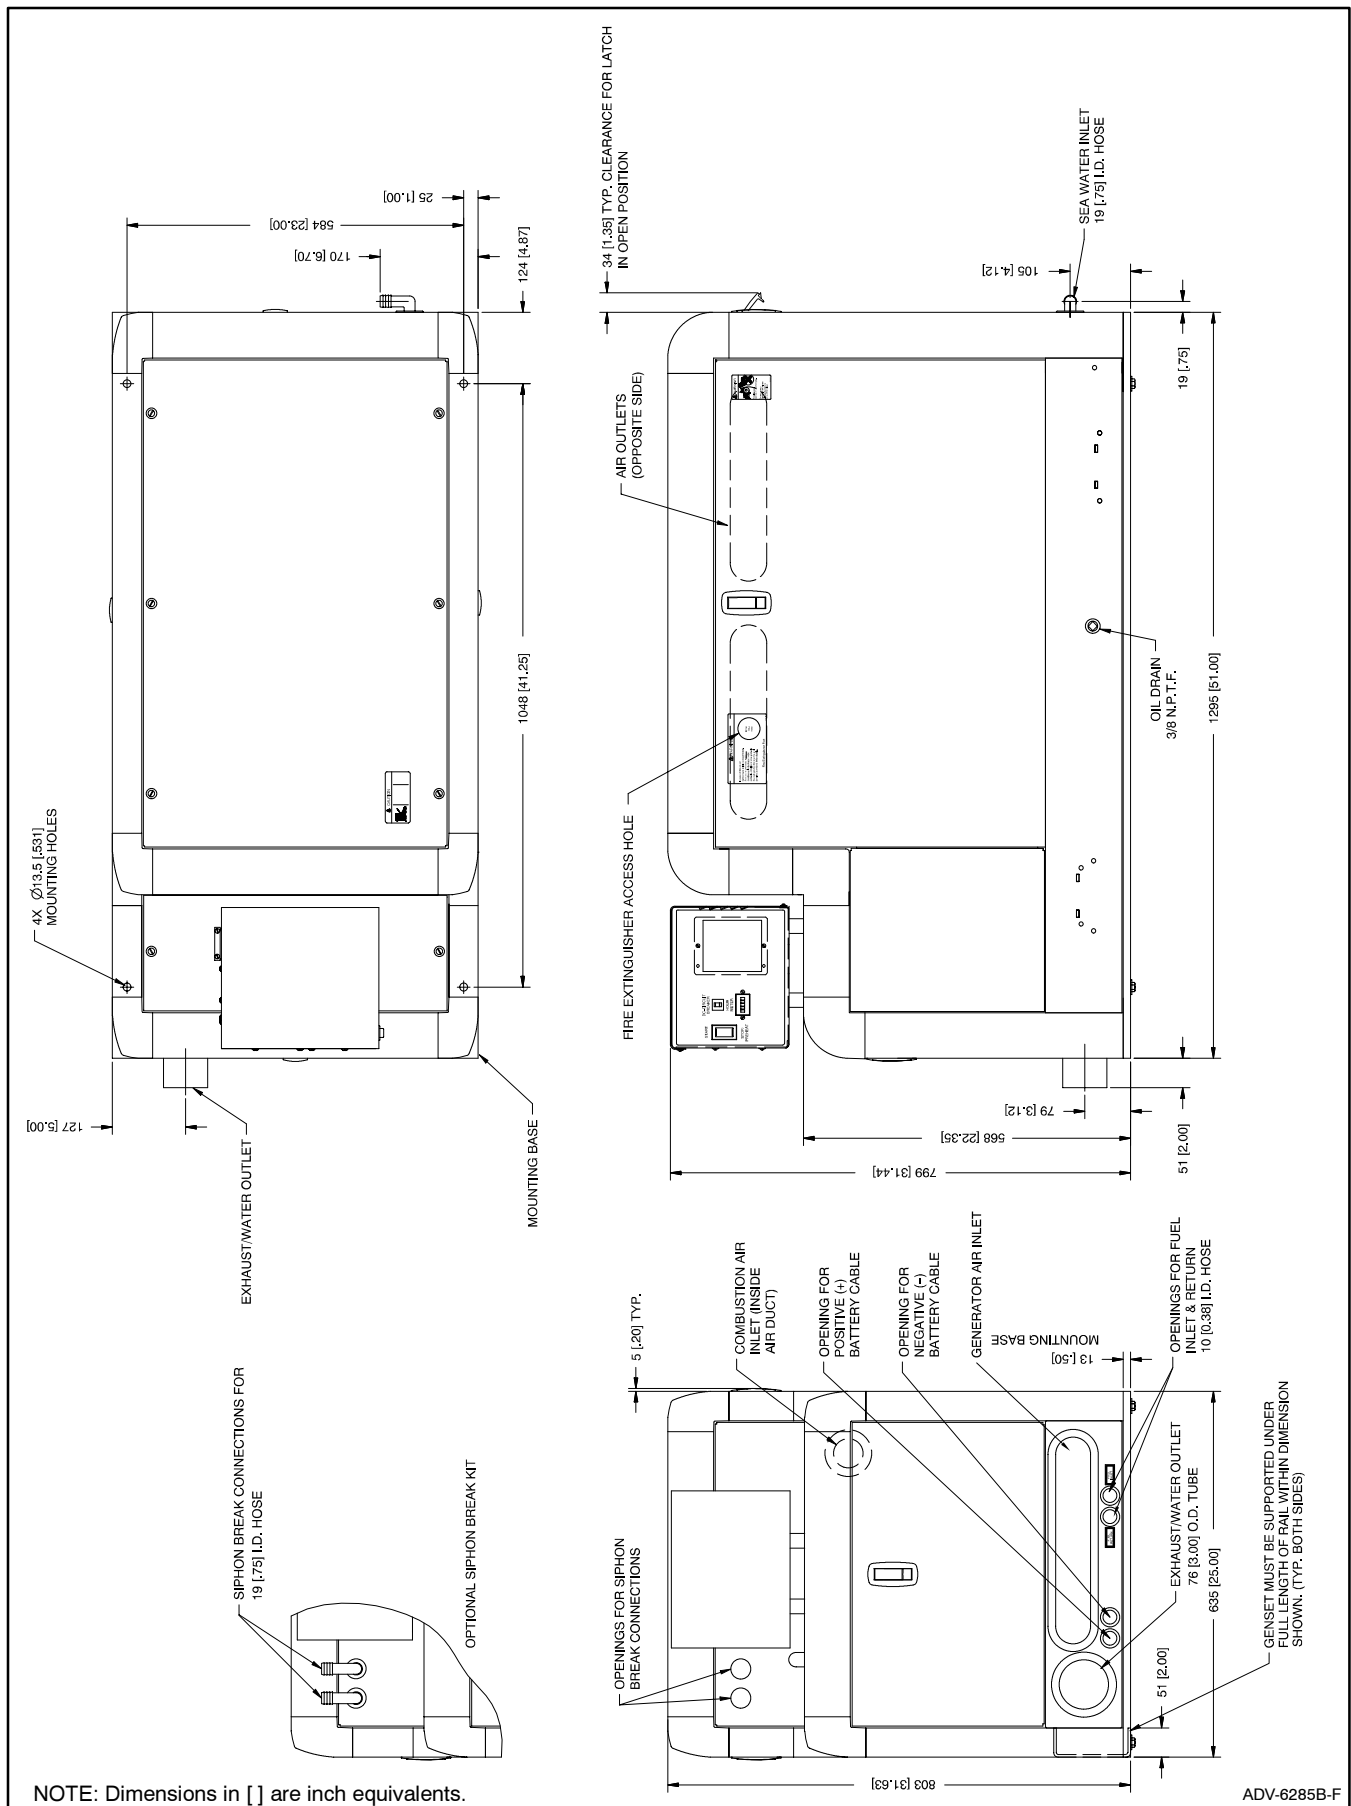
Dimension Drawing, 23/27EFOZ and 28/32EOZ with Sound Shield
